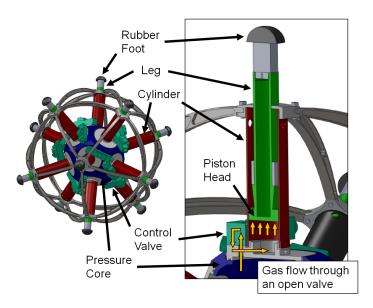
CAD DRAWING OF CURRENT 12-LEGGED PNEUMATIC *RATS* PROTOTYPE. CUTAWAY SHOWS LEG PISTON DESIGN AND PATH OF GAS FLOW FROM THE PRESSURE CORE INTO THE CYLINDER.
